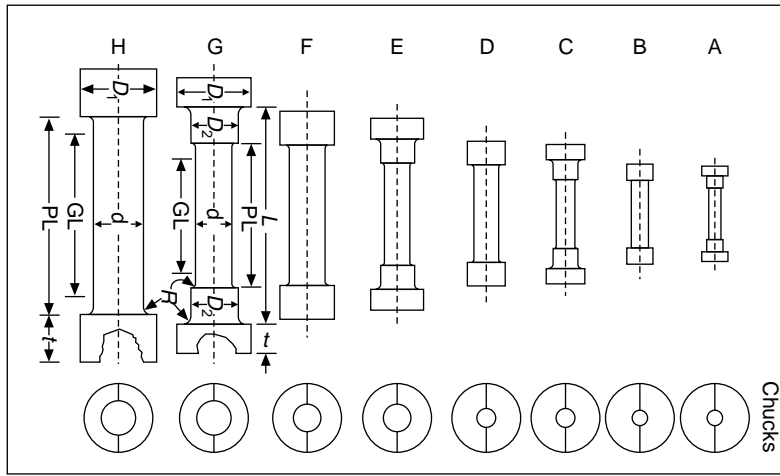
Standard tensile test specimens used in Hounsfield tensometer. (The dimensions are detailed in Table 18.3.)
